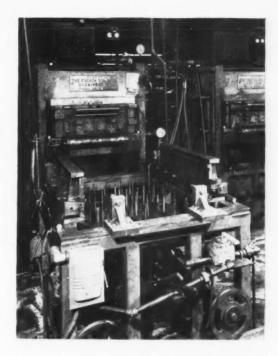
Self-contained, mobile knock-out frame (shuttle car) for handling molds by new method
